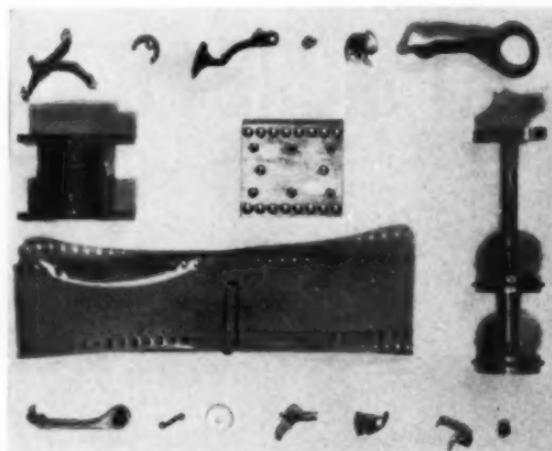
Movie film, punch and die and camera parts, all of which are inspected by projection. The punch is at the left, just above the center of the illustration.
